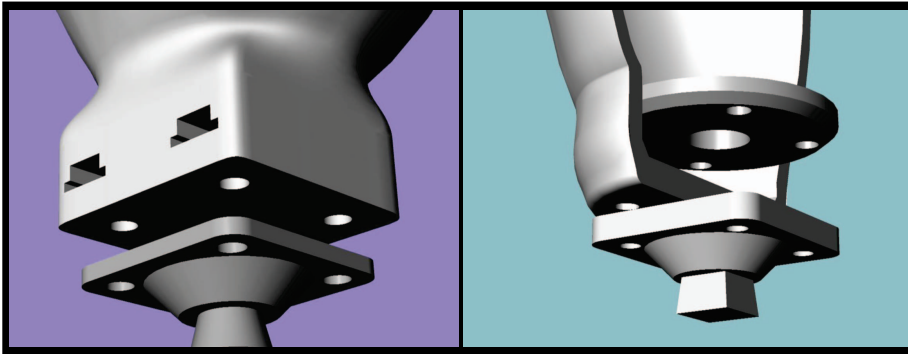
Existing Integrated Mounting Plate Designs (Rogers et al., 2007)
